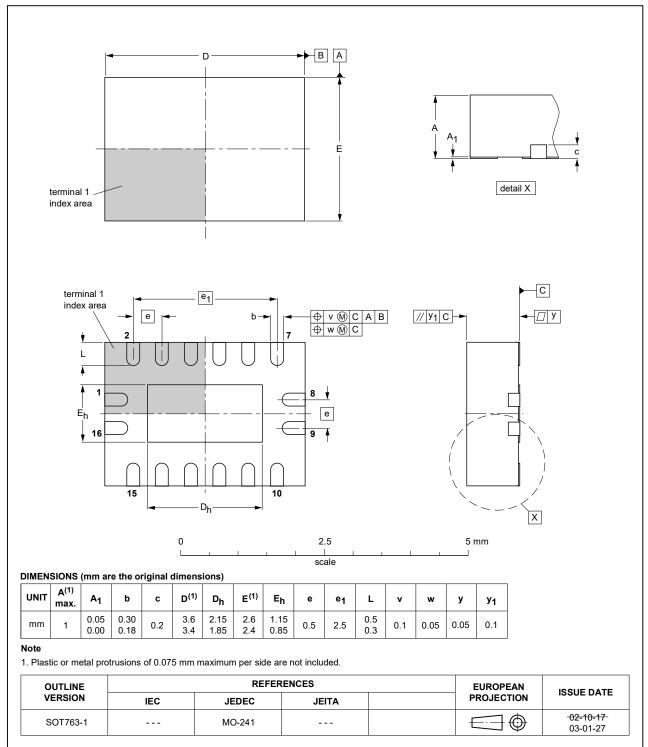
Package outline SOT763-1 (DHVQFN16)
